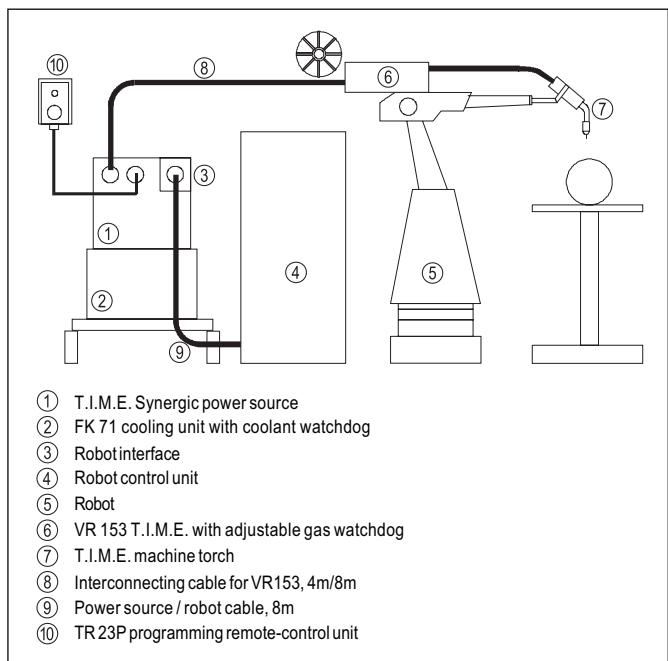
Schematic representation of standard configuration for robot welding
